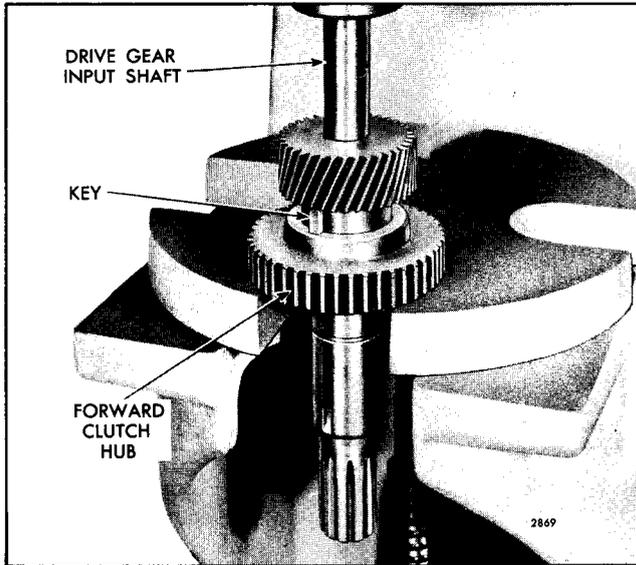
Installing Forward Clutch Hub on Drive Gear (Input) Shaft
